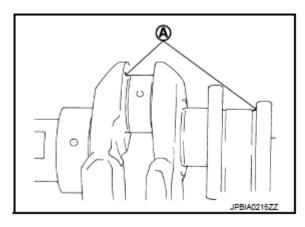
Identifying Crankshaft Fillet Area Courtesy of NISSAN NORTH AMERICA, INC.
